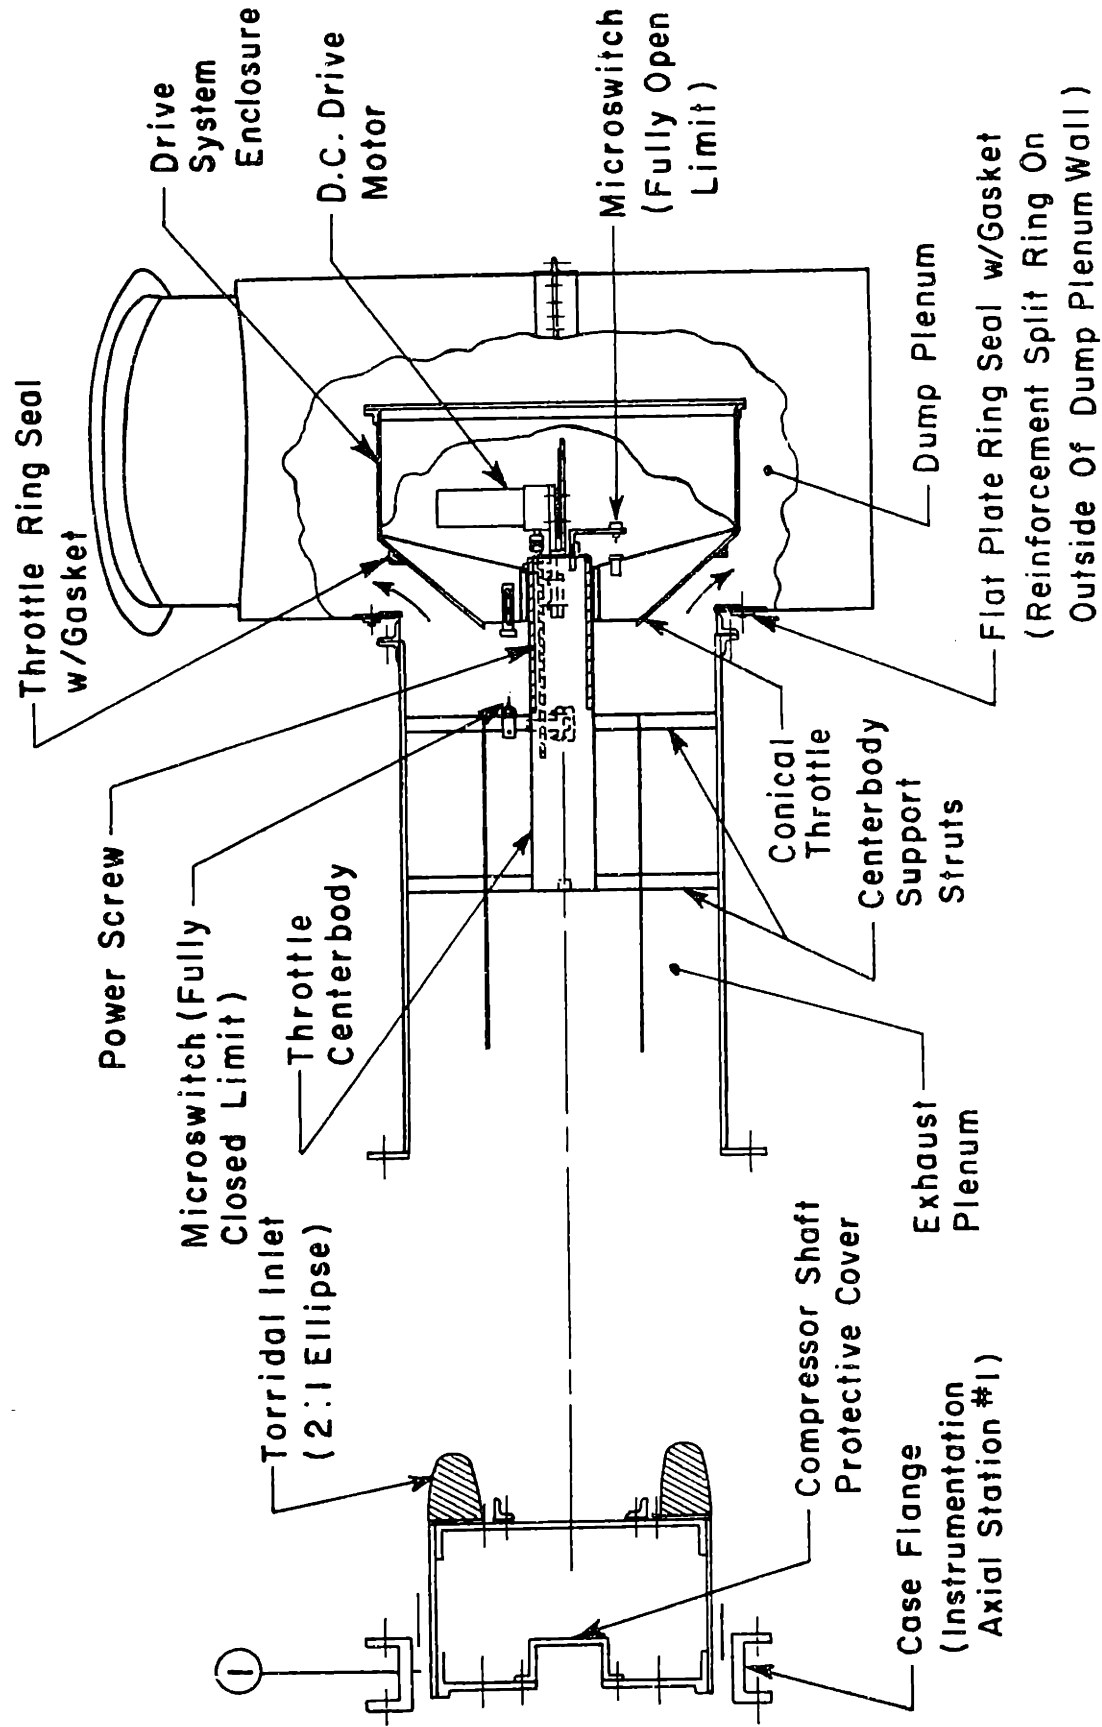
Exhaust Plenum and Conical Throttle Assembly
